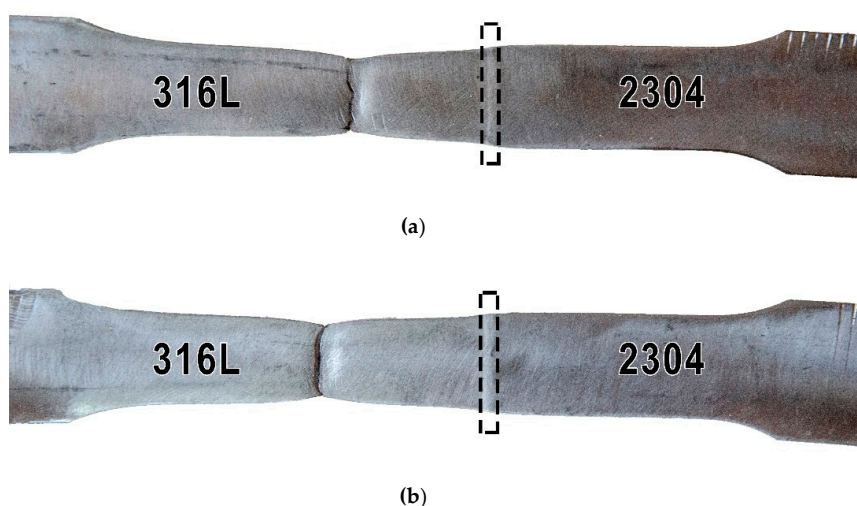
View of the specimens after a static tensile test: (a) specimen A and (b) specimen B. Welds marked by dashed contour lines.
